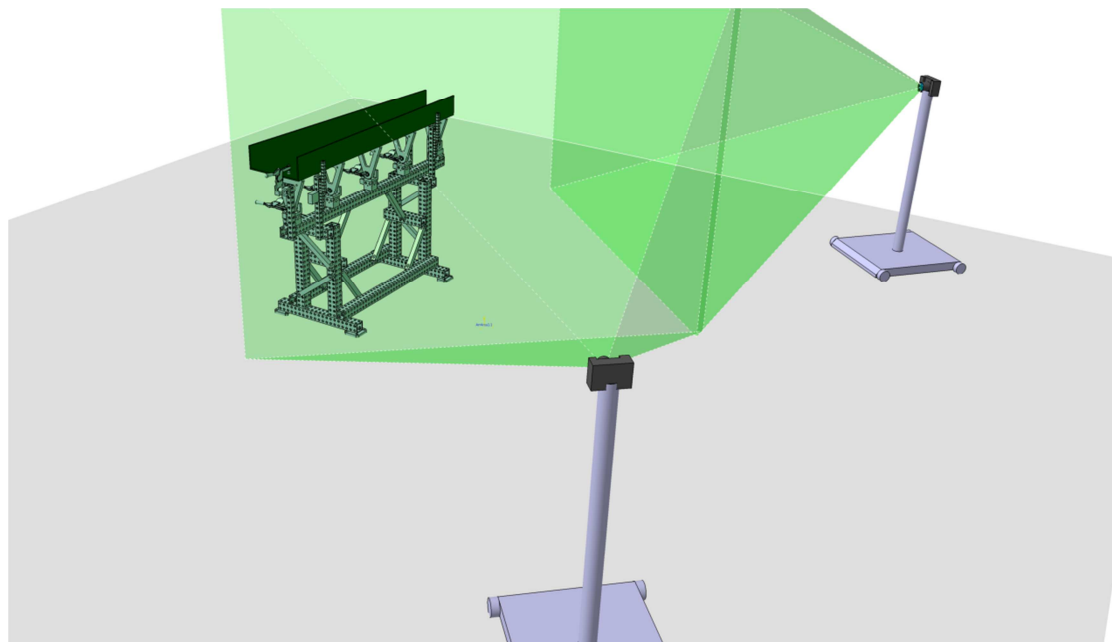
Photogrammetry measurement of an assembly jig by mobile robots
